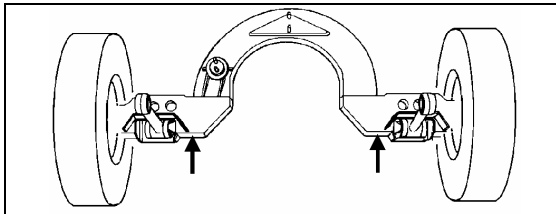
JACKING POINTS ON TAG AXLE OEH3B764
